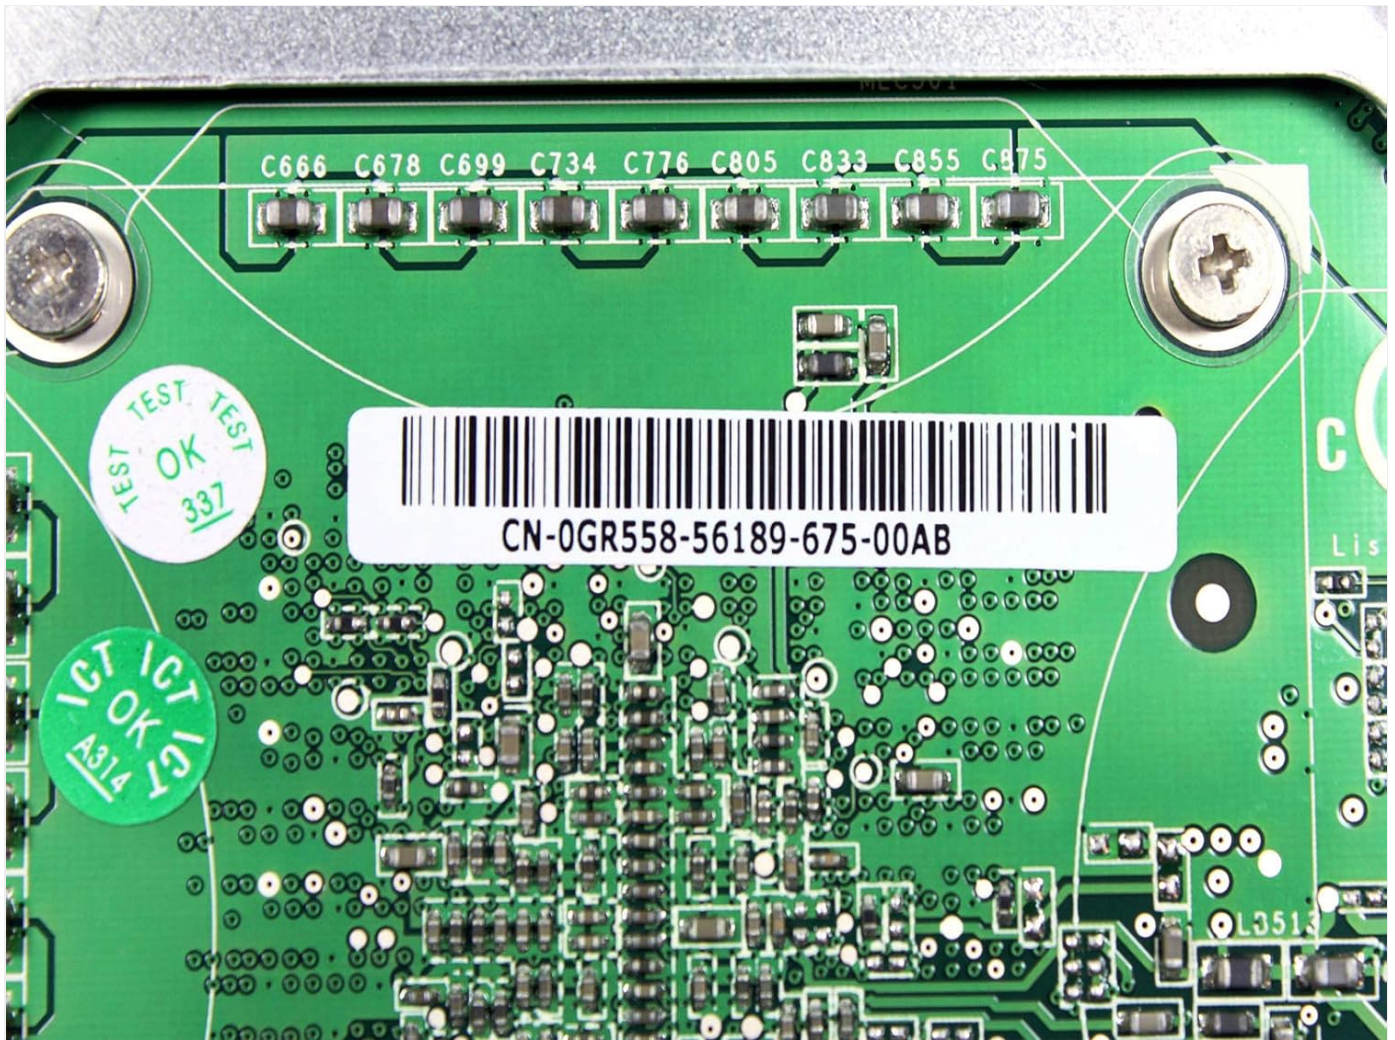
Detailed view of the PCB, highlighting a part number (e.g., [CN0GR5585618967500AB](#)) and quality control markings.
